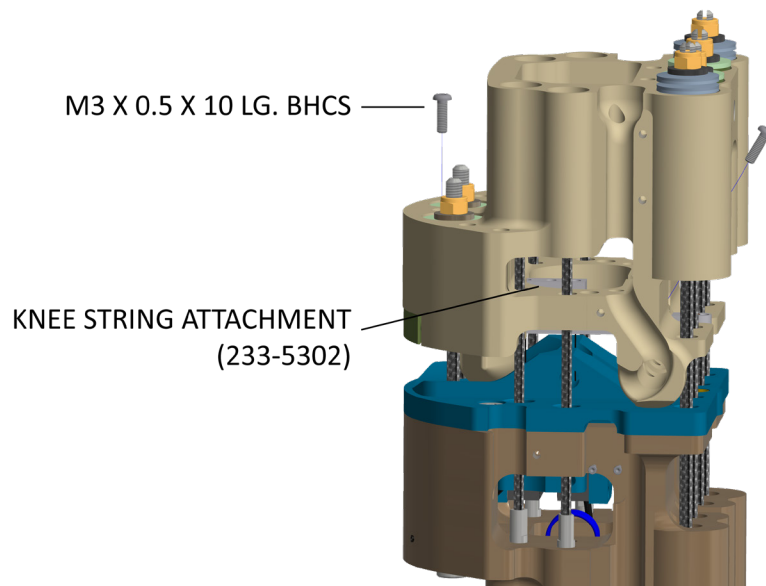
Remove the Fasteners from the Knee String Attachment
